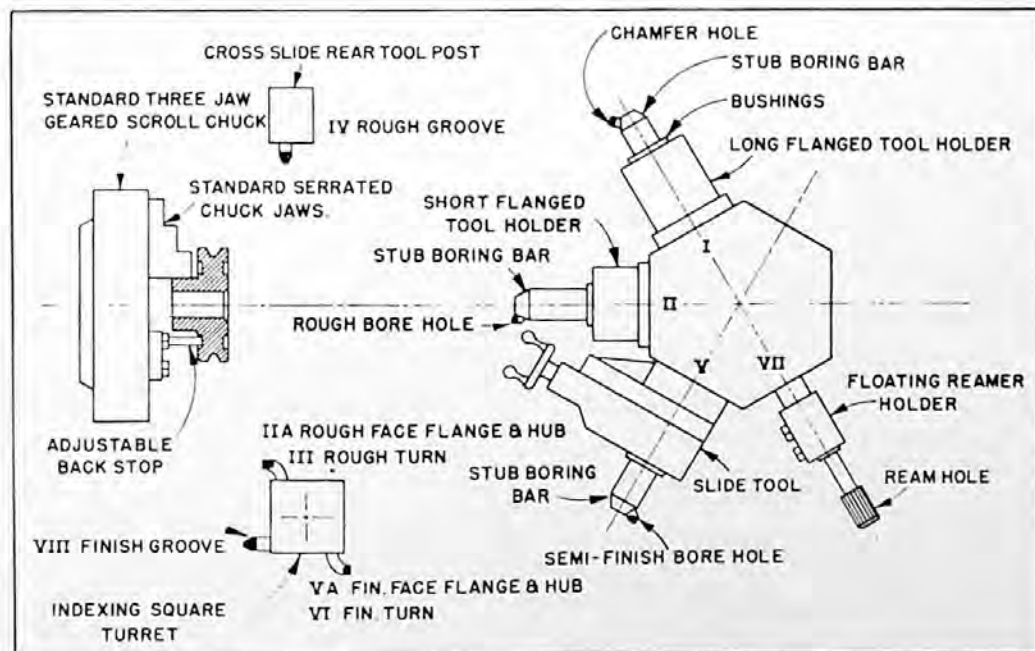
A typical small lot turret lathe setup for machining a cast iron "V" belt sheave. Standard tool holders are used together with stock carbide tipped cutters. Note that sufficient clearance is improbable between the chuck jaw and the back face of the rim thus necessitating a second operation to face this surface.
